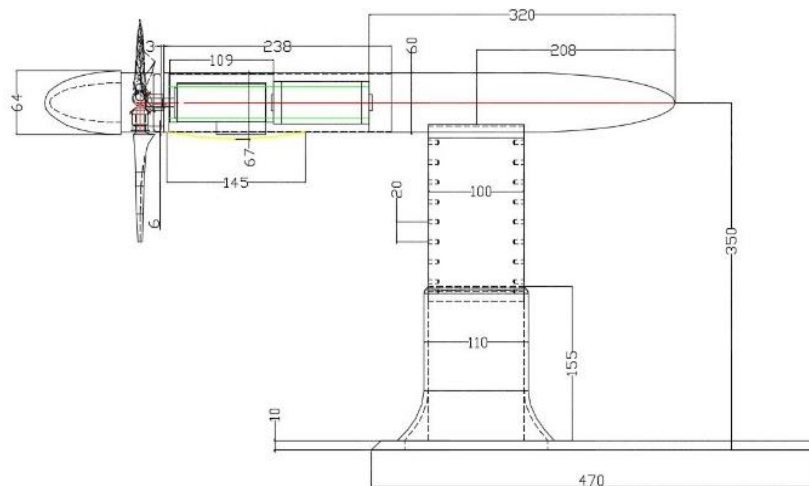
Schematic of Location of Motor and Thrust Sensor with Main Dimensions (mm).
